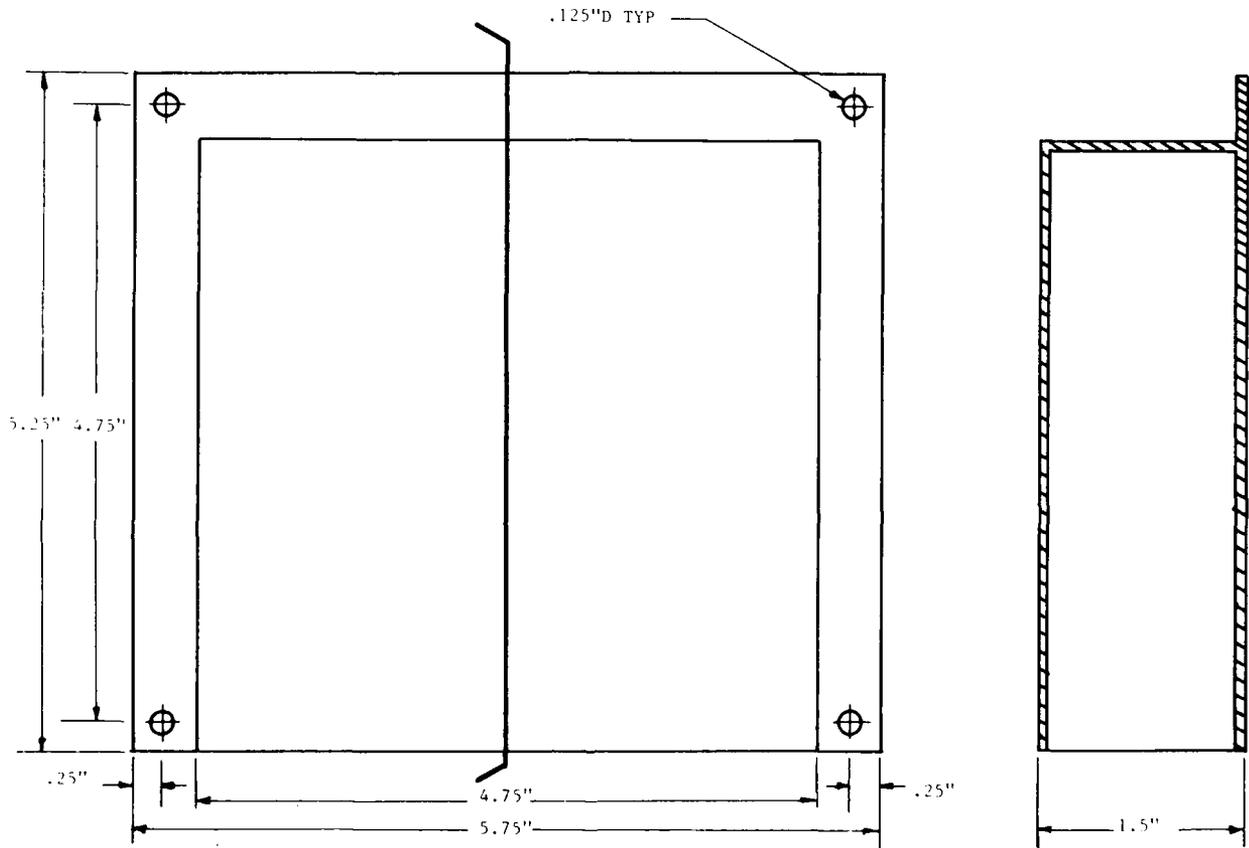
Fan cover, front and side sectional views; unless otherwise specified, tolerances are  $\pm .02$
